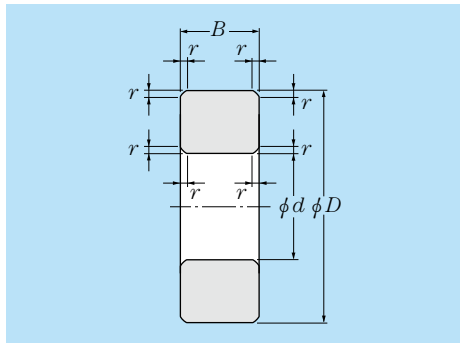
Radial bearings (excluding tapered roller bearings)
